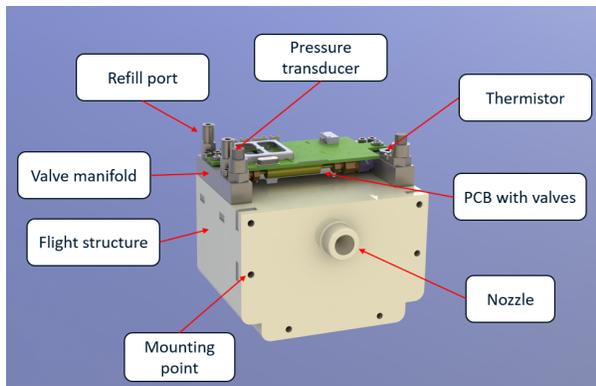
CAD model of the SEPS, with examples of major components called out.¹¹
